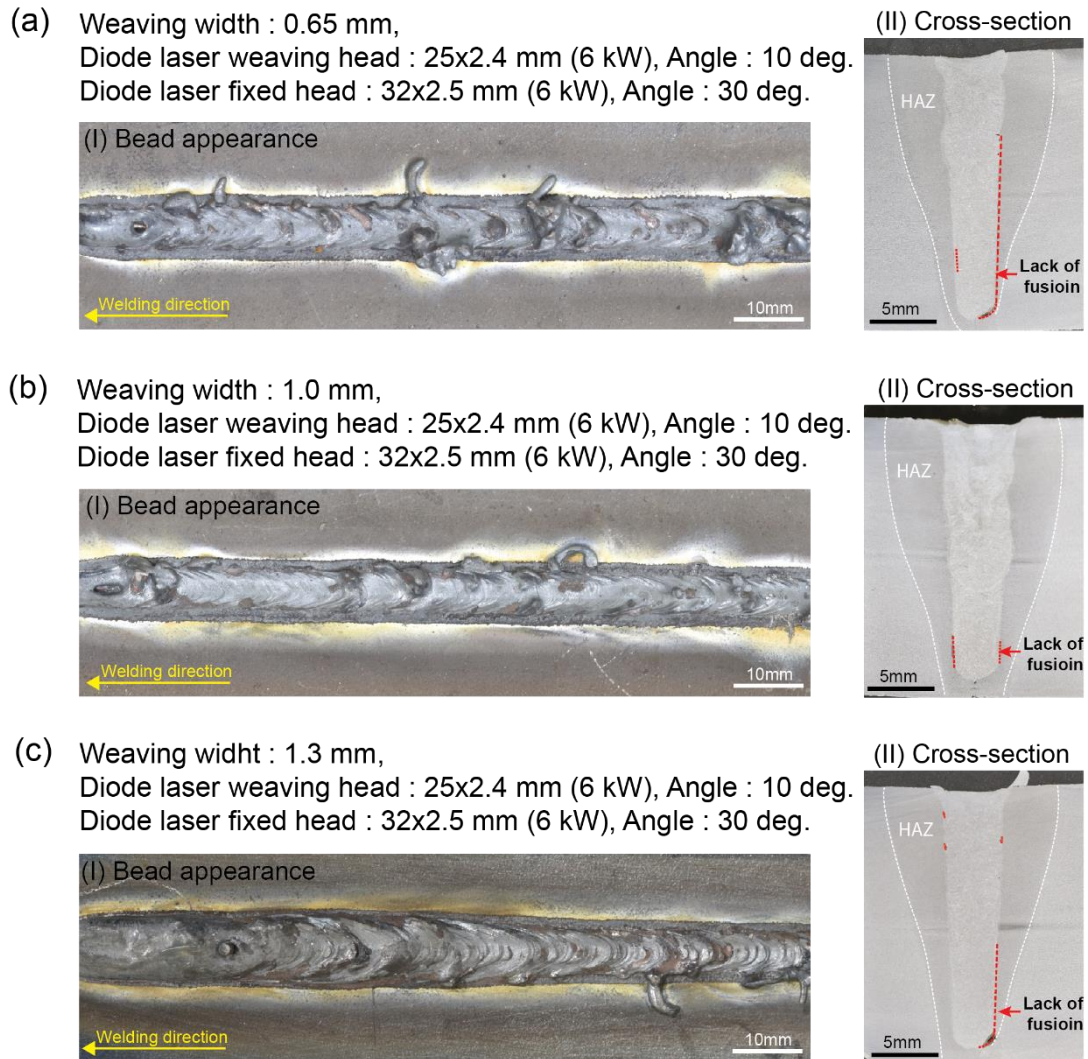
Weld bead and cross-section on several weaving width.
